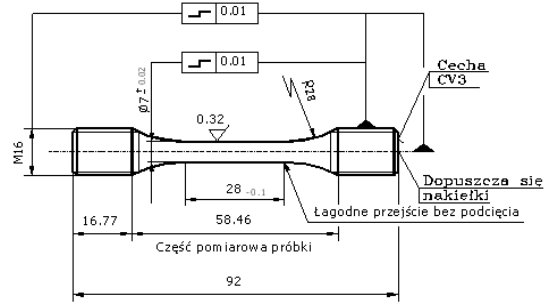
Shapes and dimensions of specimens for high-cycle fatigue (HCF) testing
